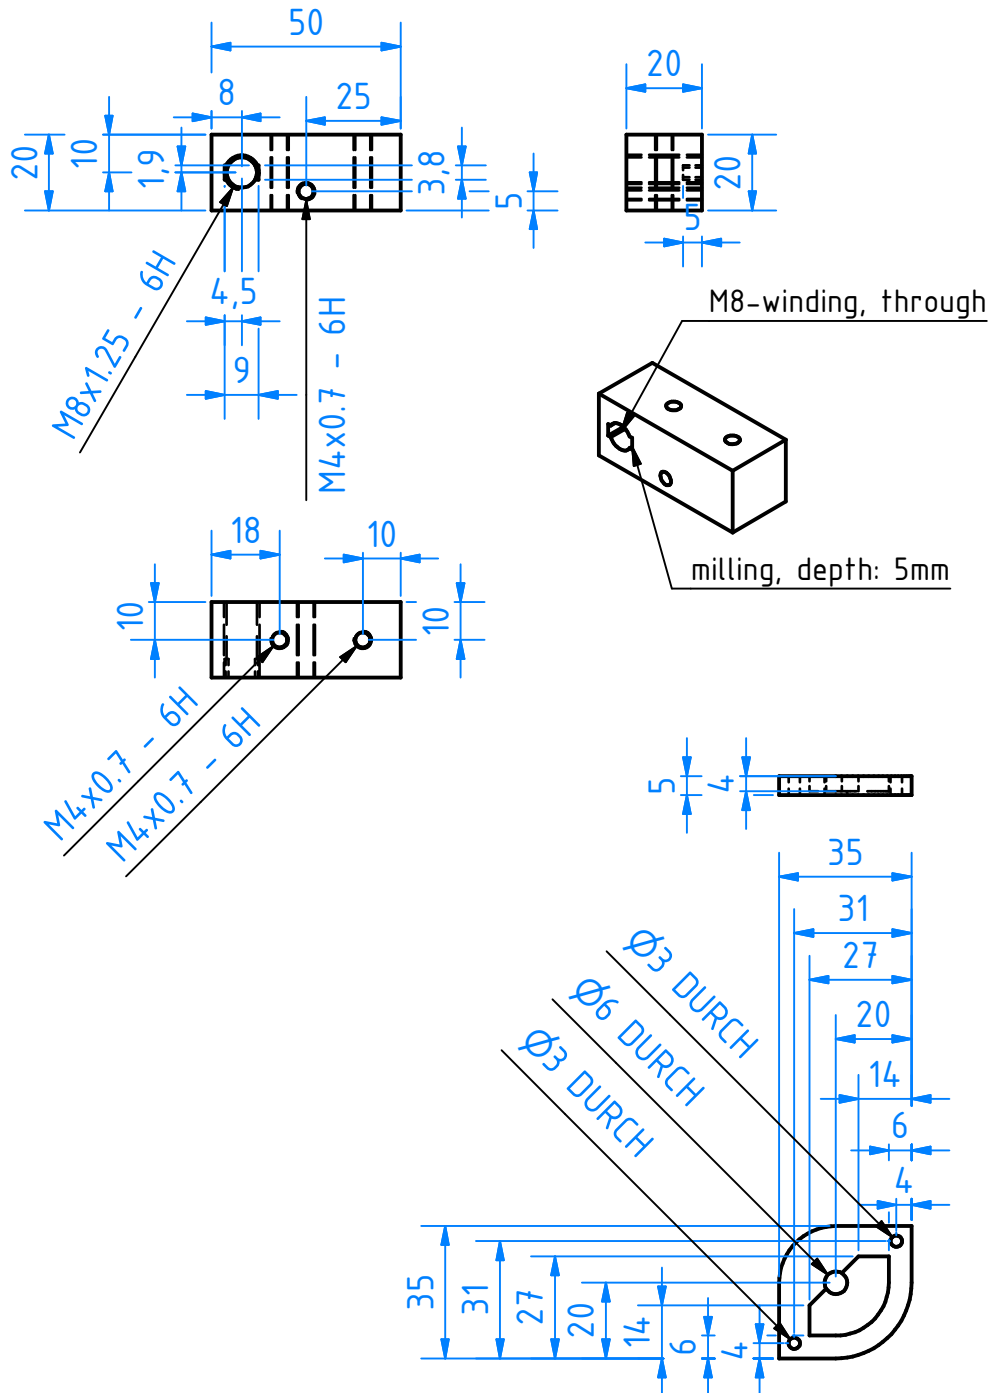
Technical drawing of the foot and the cap, the latter fixing the shutter unit (1 : 2 scale).
